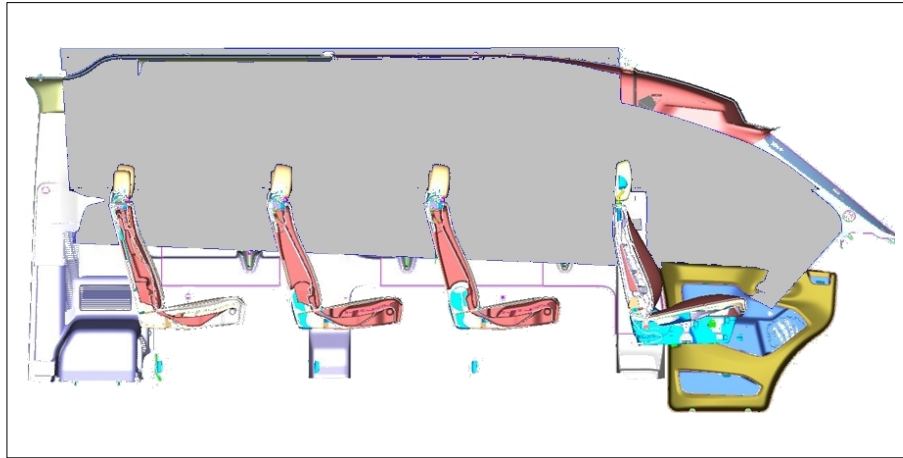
TRANSIT OCCUPANT PROTECTION ZONE (TYPICAL)
